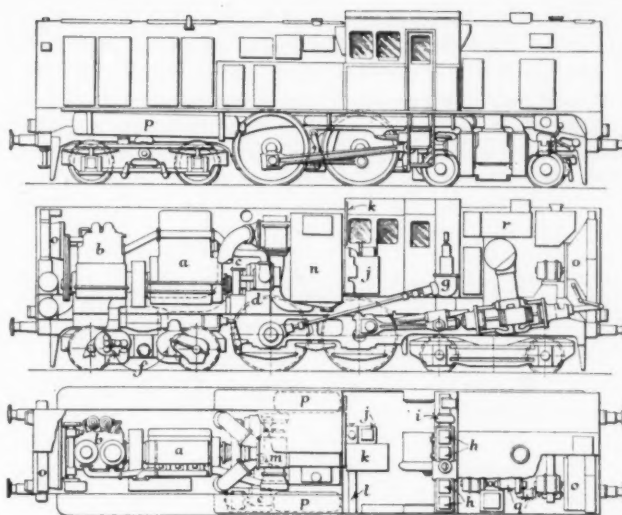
THE HUMBOLDT-DEUTZ DIRECT-DRIVE DIESEL LOCOMOTIVE
